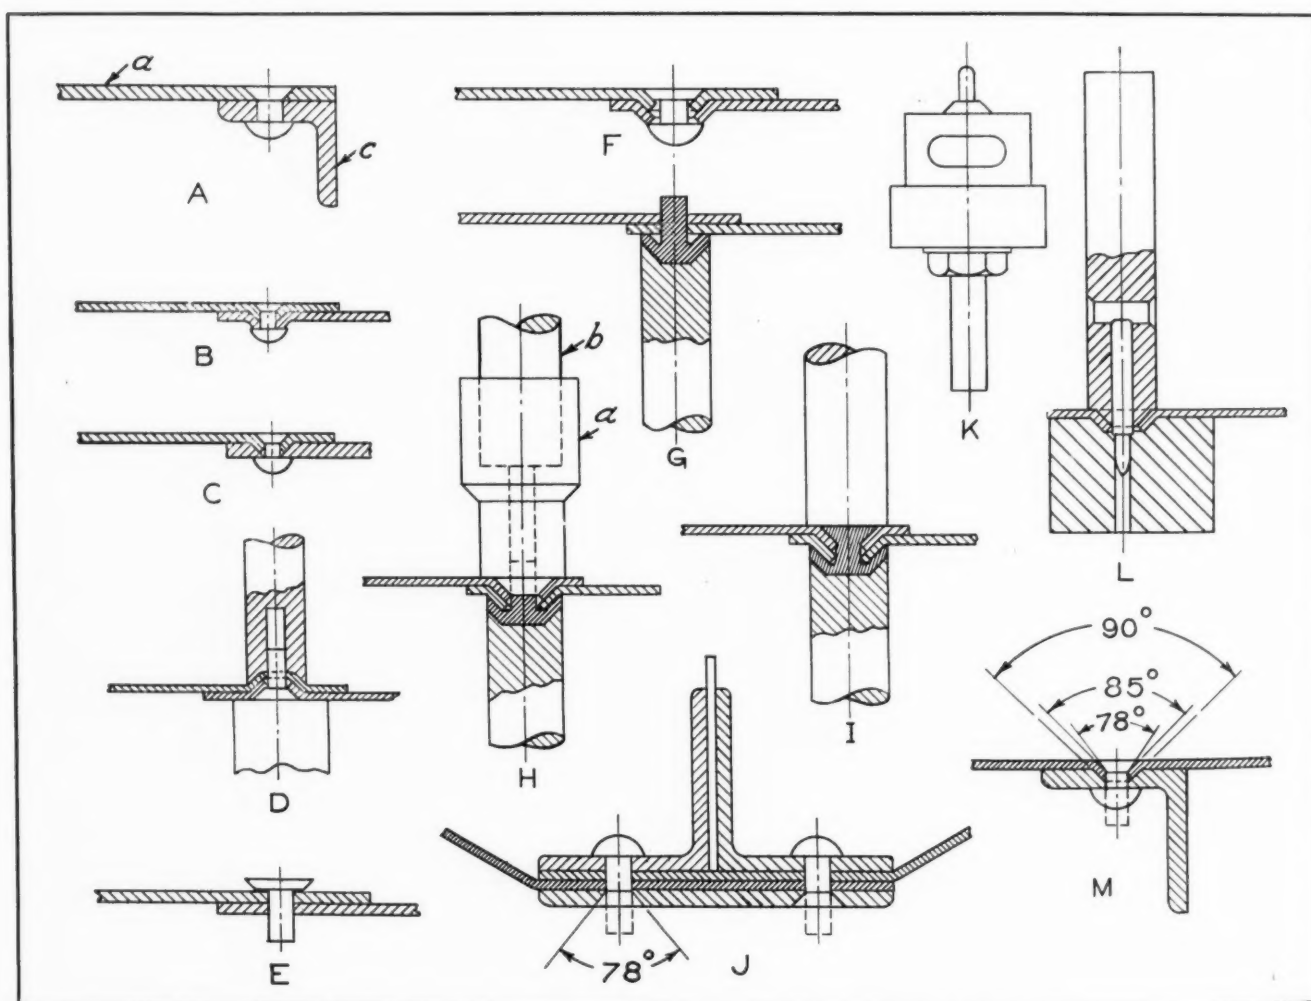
Examples of Riveted Joints Employed in Airplane Construction, and Tools Used in Riveting
